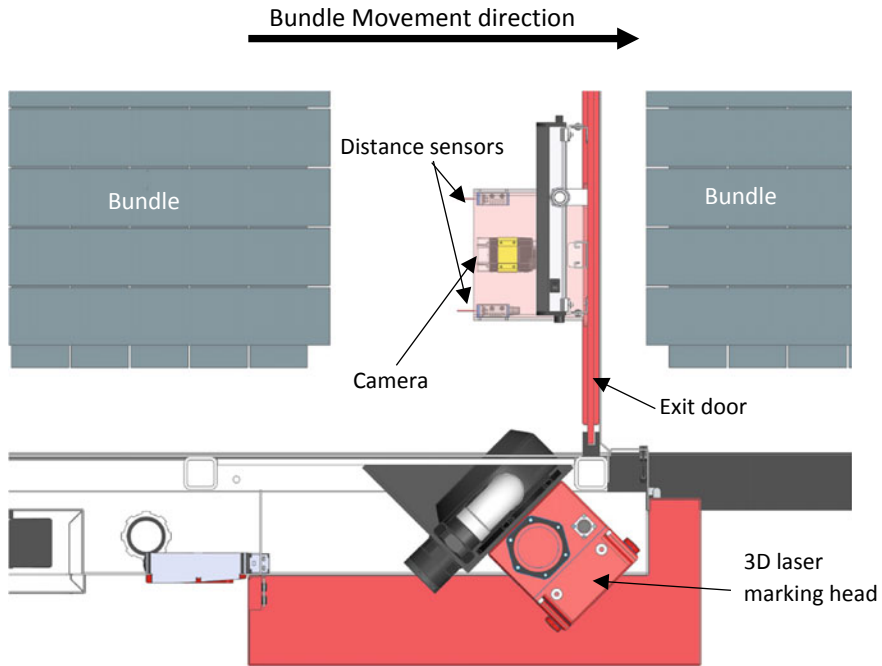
Top sectional view of the laser marking machine to mark front or back side of the parts
